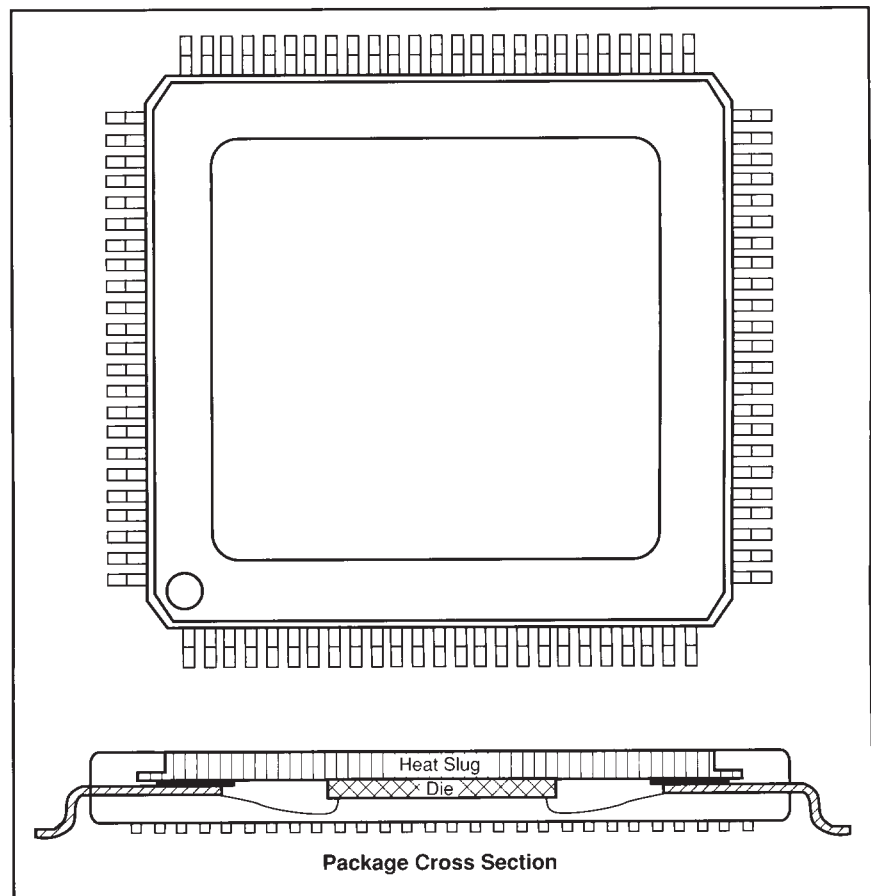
Package Outline Drawing — 100 TQFP TEP.
